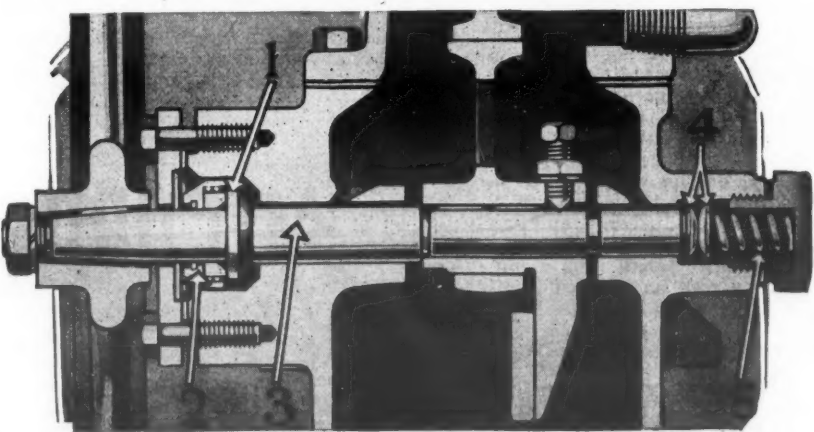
Stuffing box and shaft assembly, diaphragm type. (1) Shoulder on shaft; (2) stuffing box; (3) shaft; (4) thrust washer; (5) spring.
